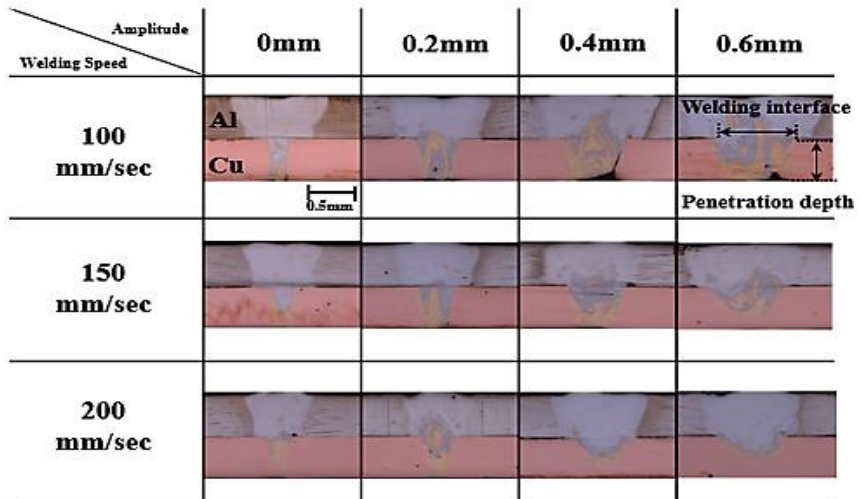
Bead profiles analysis of welded joint with various welding speeds 100~200mm/sec; bead cross section
